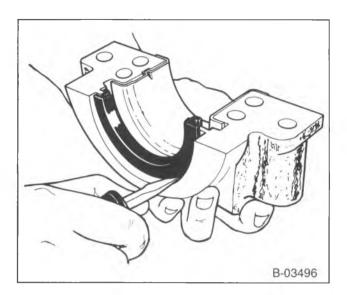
Removing the Rear Crankshaft Seal (7.4L Engines)
